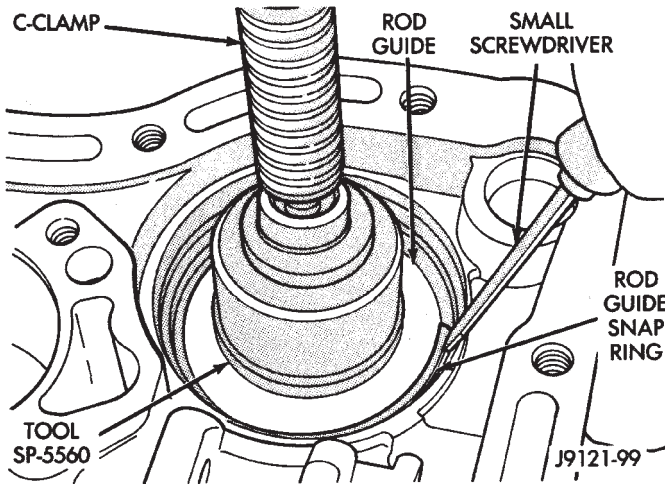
Front Servo Rod Guide And Snap Ring Installation
